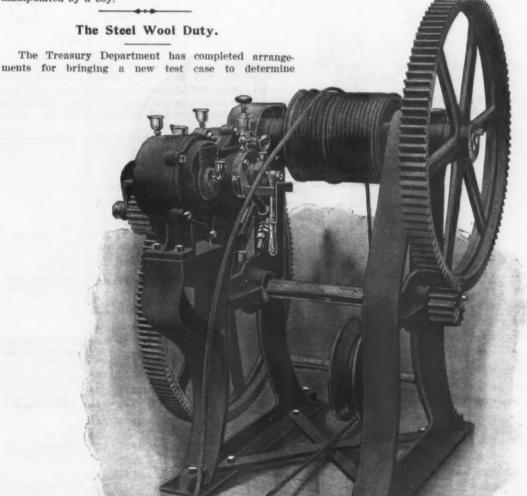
An Equipment for Traversing Heavy Parts of Machine Tools. Built for the Niles Tool Works by the Pilling Air Engine Company.
